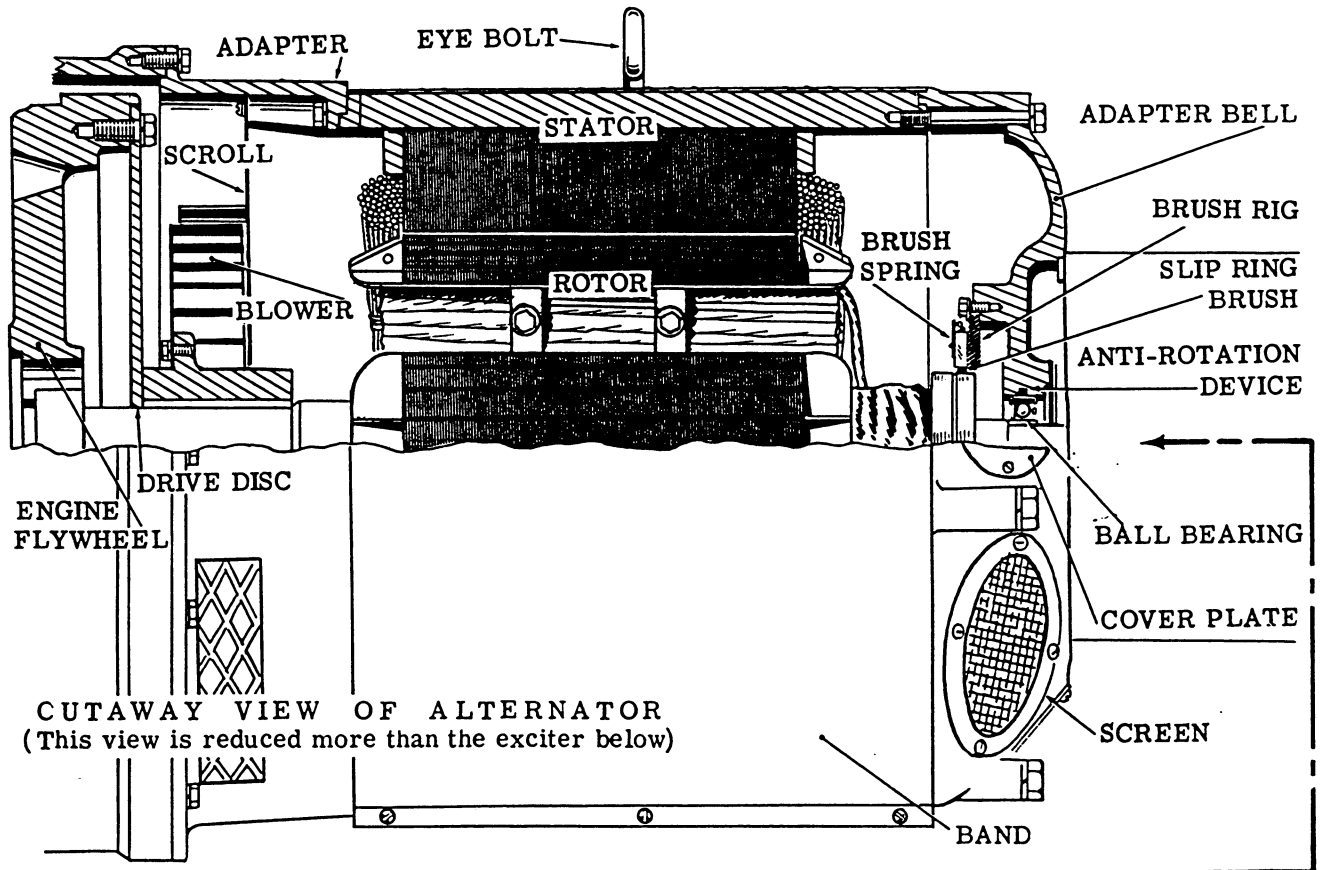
GENERATOR ASSEMBLY WITH EXCITER BALL BEARING.
